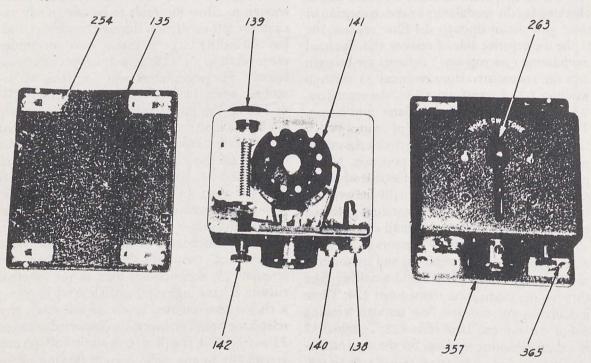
Radio Control Box BC-AL-232 With Base Removed and With Base and Mounting FT-118 in Place
